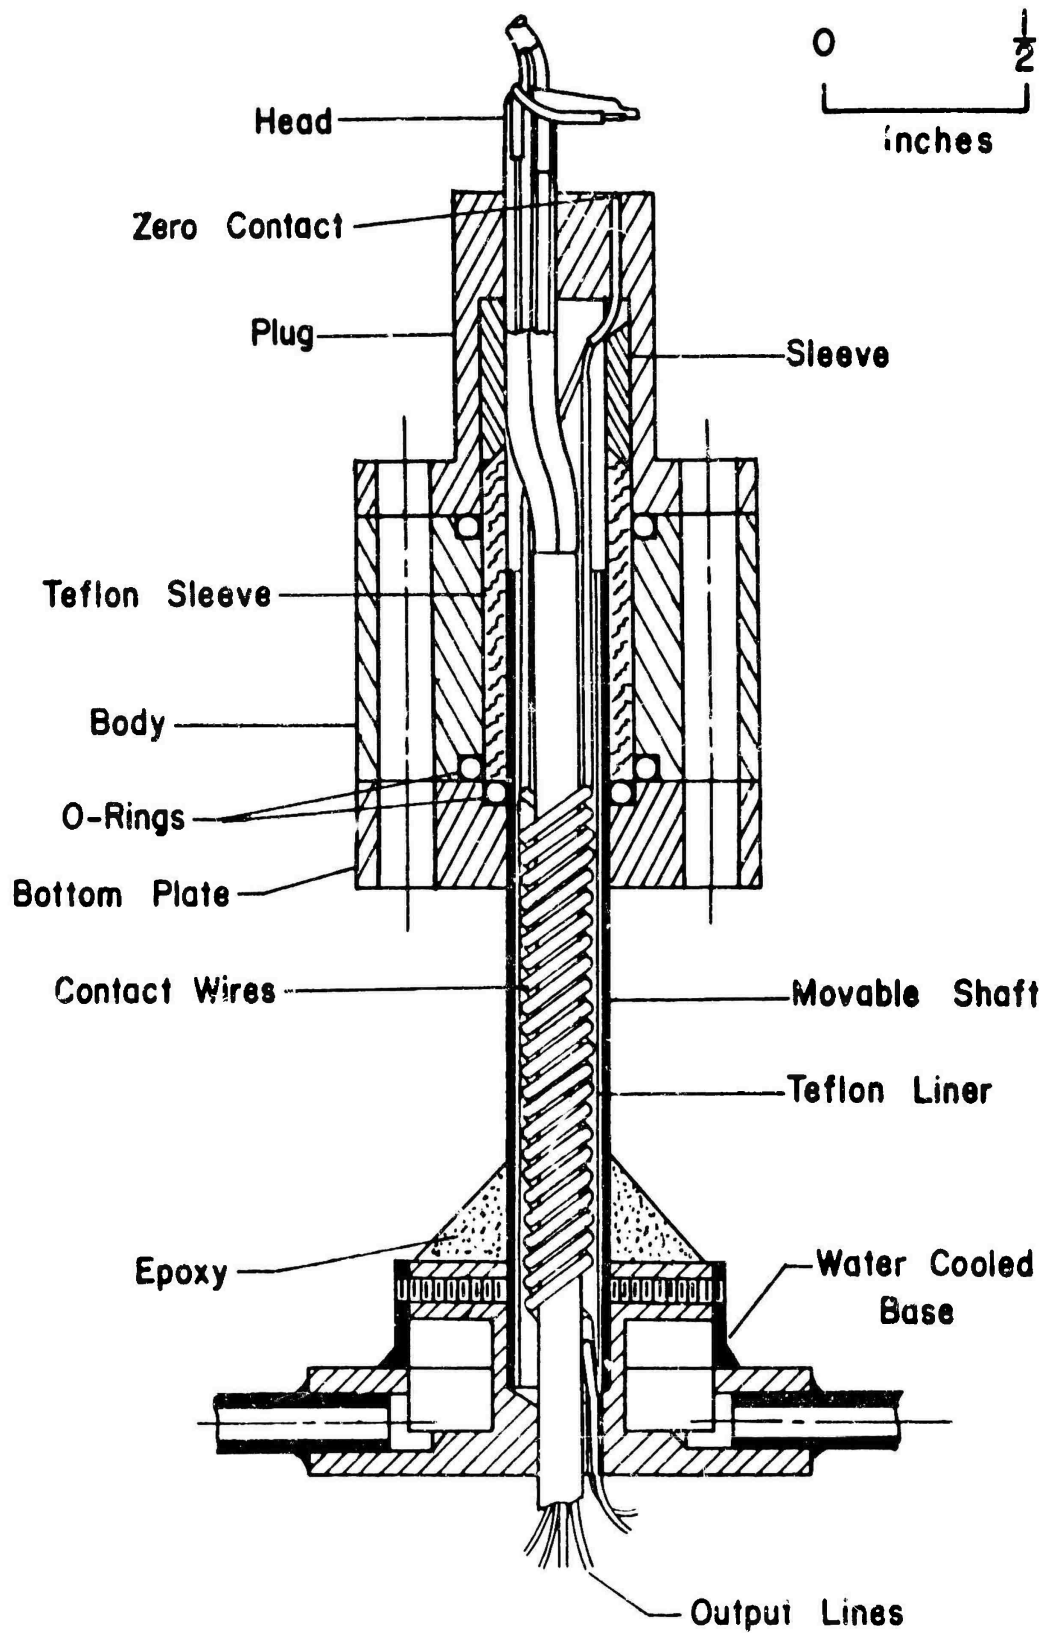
Sectional Drawing of the Boundary Layer Probe
